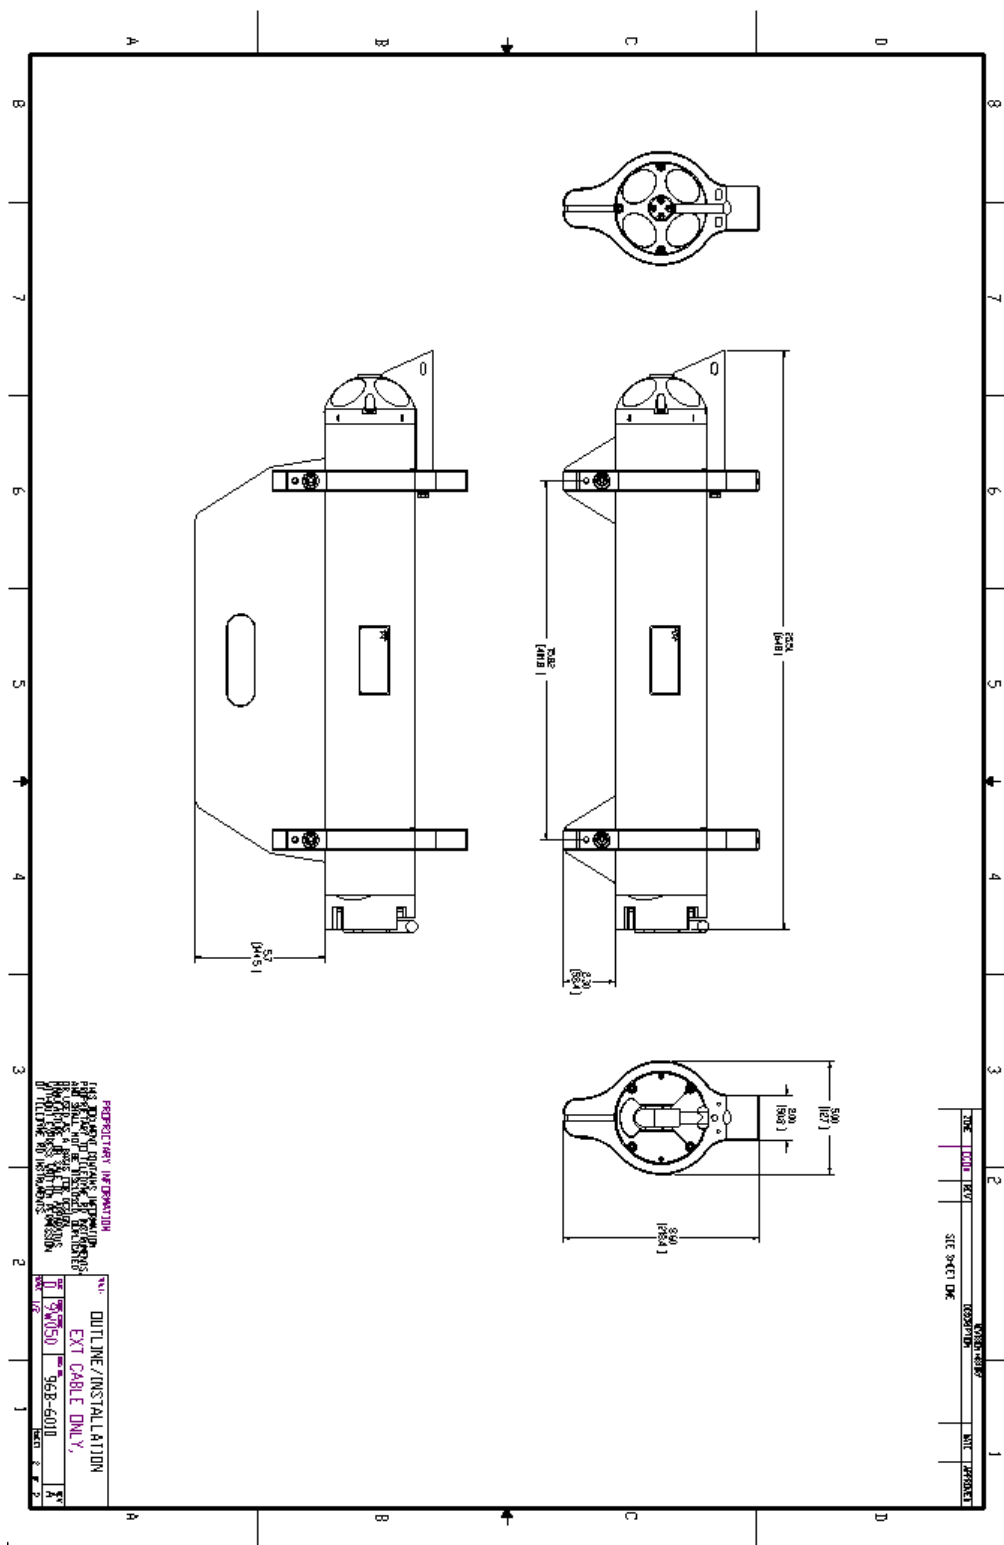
Outline Installation Drawing 96B-6010 Sheet 2
